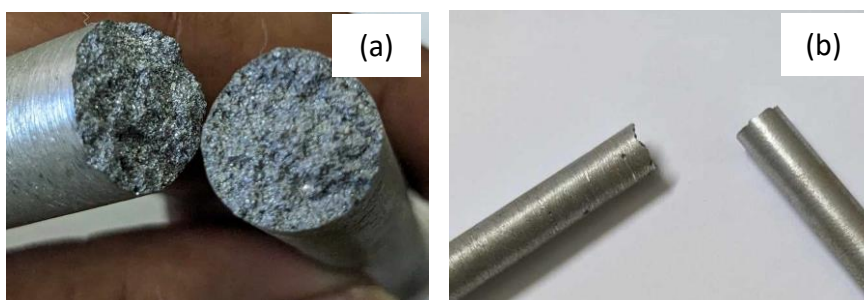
Fracture surface of the control sample (Pure Al) after tensile test: (a) top view, (b) side view
